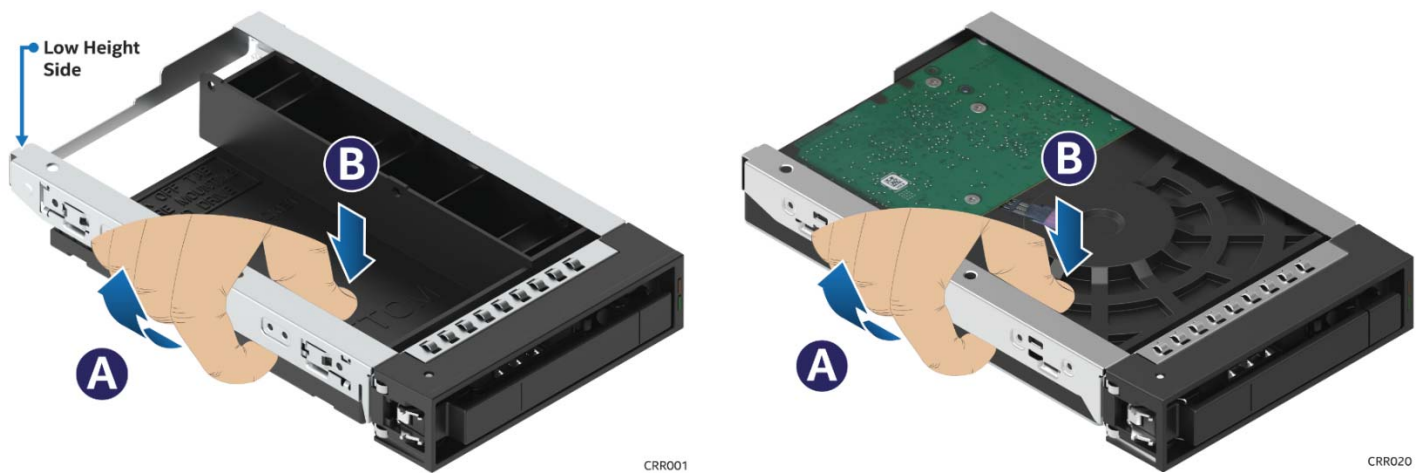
3.5" Drive Carrier Assembly - Drive / Drive Blank Removal
